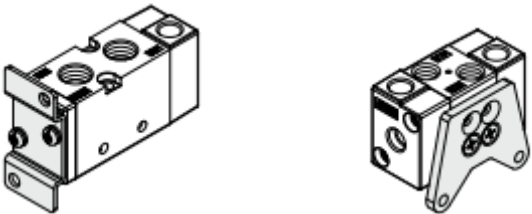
Single type VFA1000/3000 (left) and double type VFA1000 only (right)
